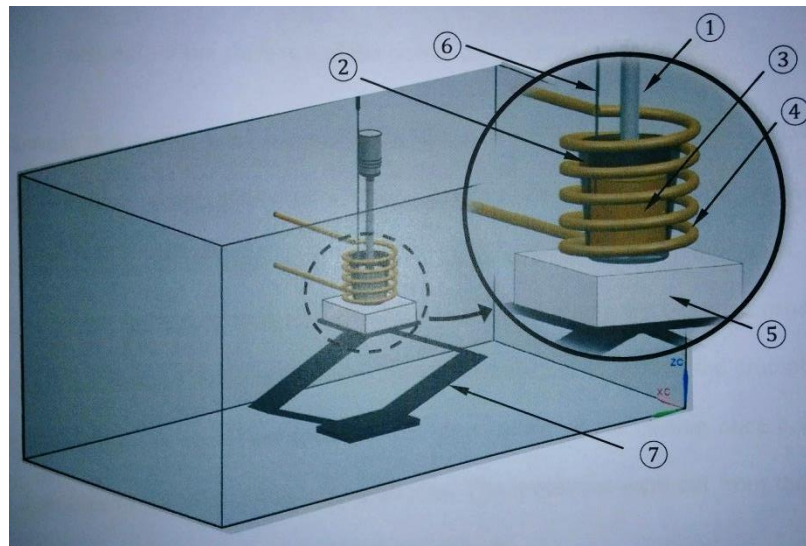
Induction furnace chamber with the following; 1) Stirrer, 2) machinable alumina crucible, 3) liquid alloy, 4) induction heating coil connected to power supply, 5) ceramic block, 6) K-type thermocouple, 7) screw jack
